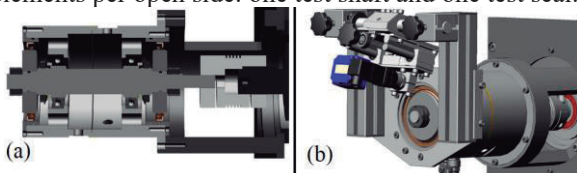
Cross-section of the test cell of high acceleration test bench (a), test cell with mounted pressure sensor (b)
